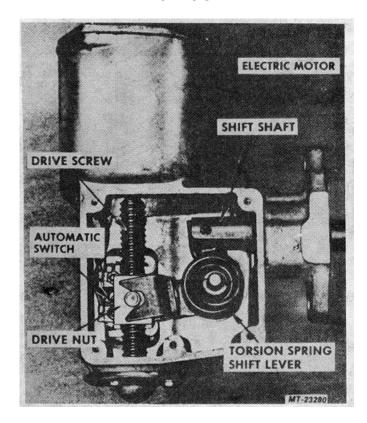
Electric Shift Motor for Tandem and Two-Speed Axles (Cover Removed)
